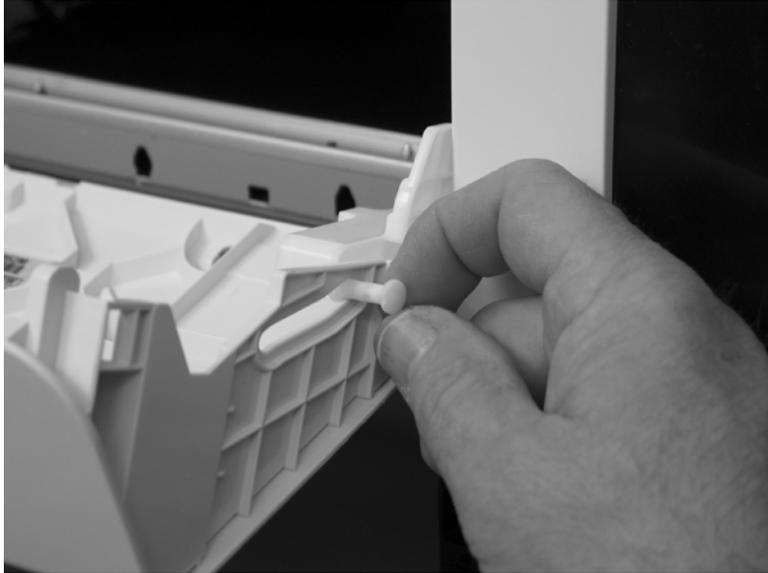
Remove the front door and front-lower cover (5 of 8)
